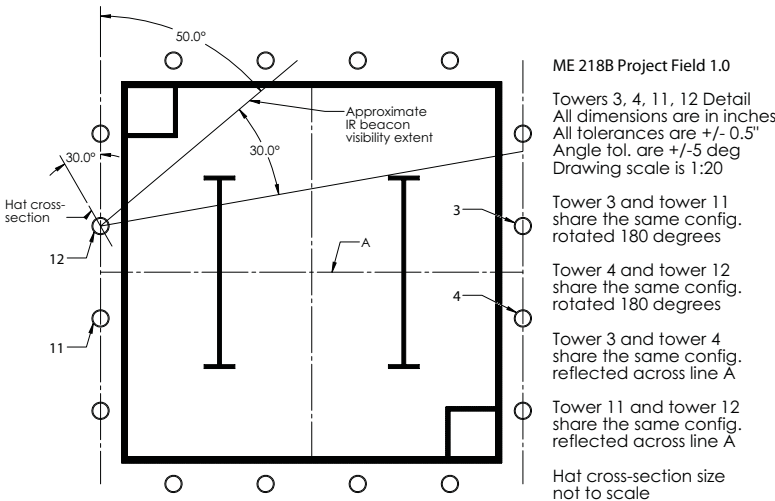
Goal Tower Detail for towers 3, 4, 11 & 12
